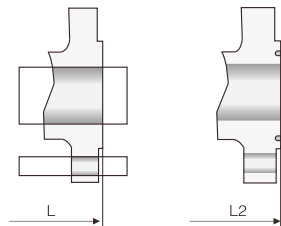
Dimensional datas of Pressure Seal Check Valve Class 900LB
